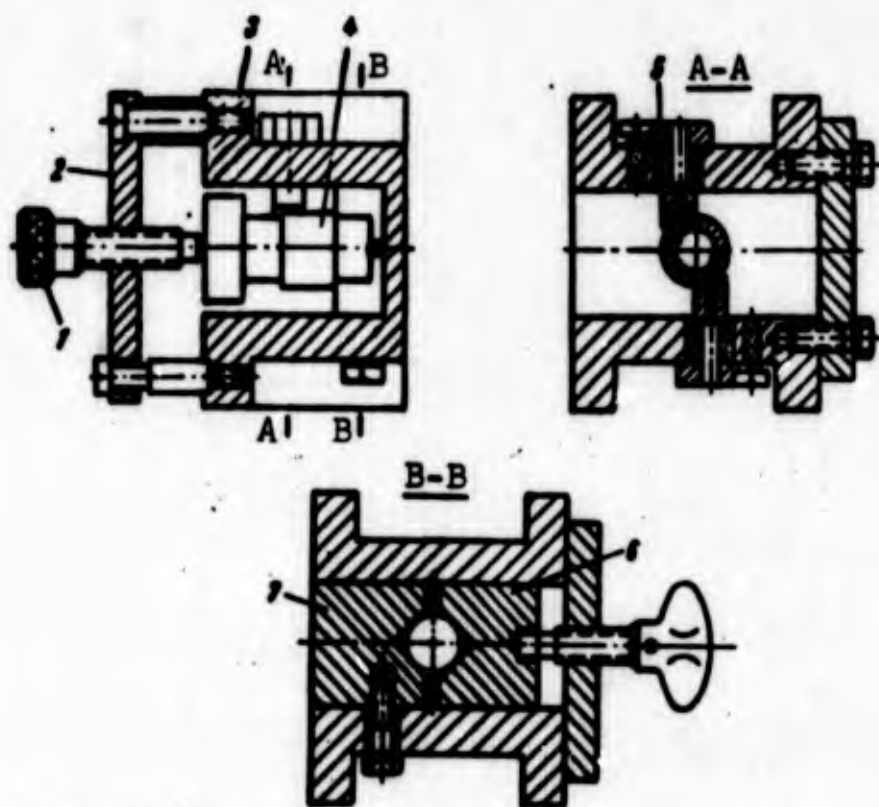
Jig for drilling tangential holes in an injector. 1) clamp screw; 2) hold-down; 3) casing; 4) processed part; 5) jig bushing; 6) mobile prism; 7) fixed prism.
